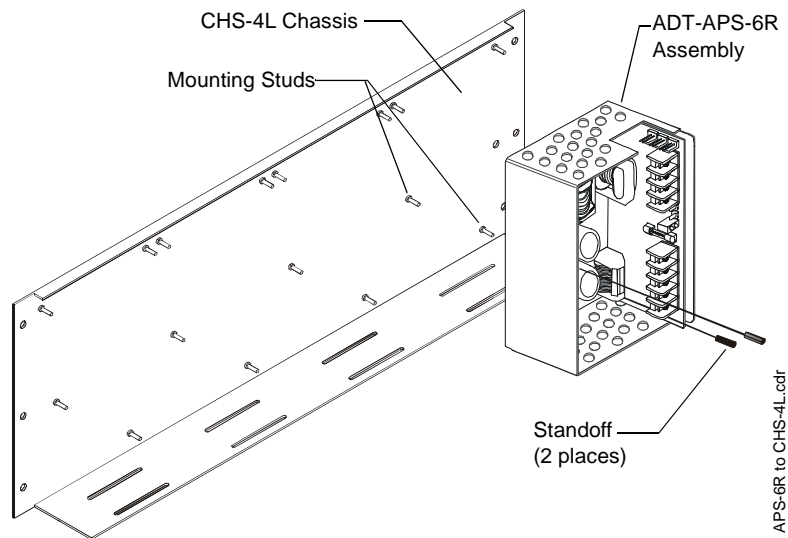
Mounting an ADT-APS-6R to a CHS-4L Chassis
